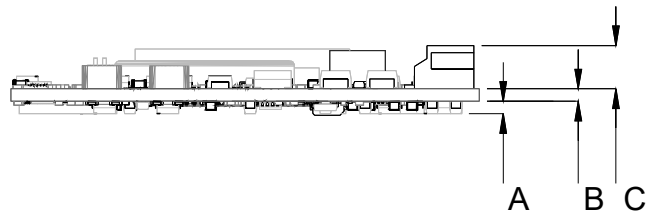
XETK-V2.0B Dimensions - Side View
